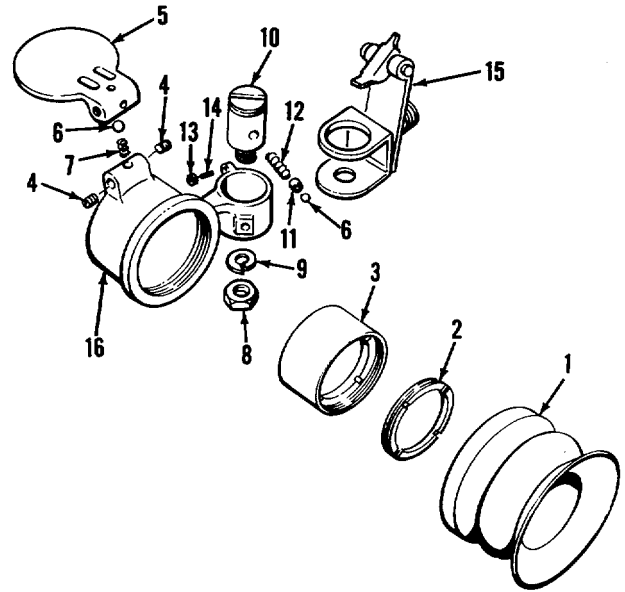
Firing mechanism group (M20A1 and M20A1B1)-partial exploded view
